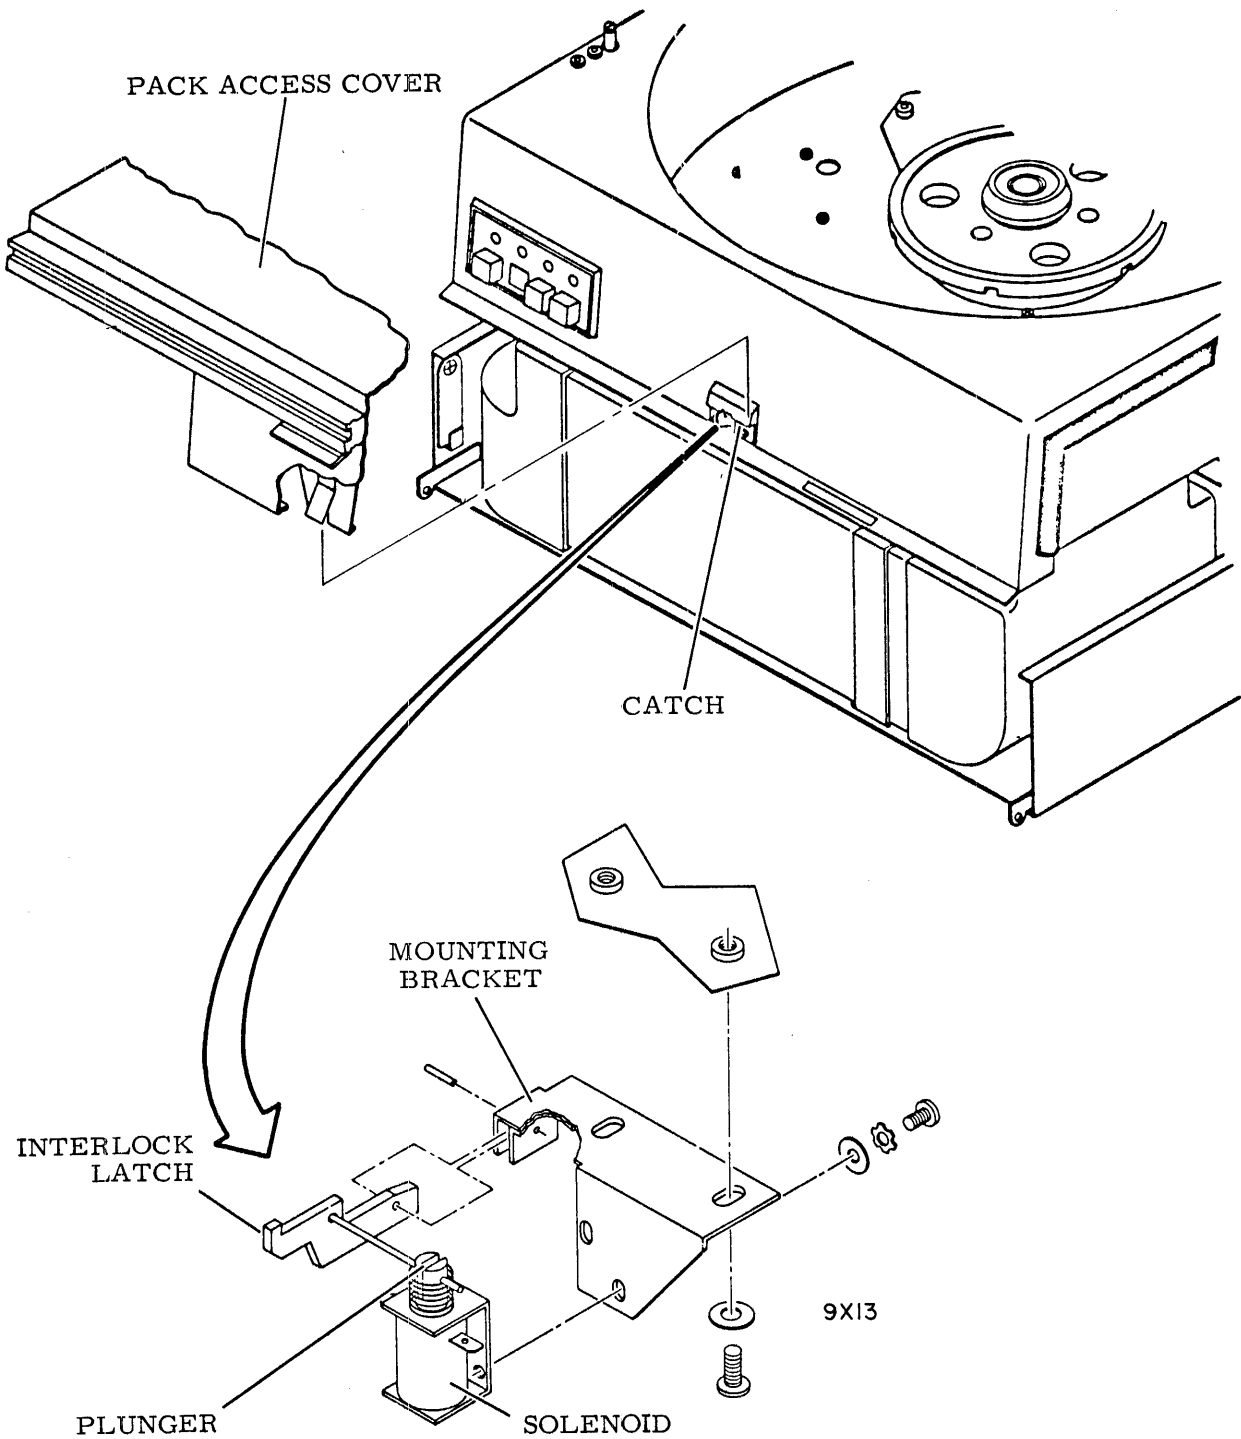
Pack Solenoid Adjustment (Sheet 2)
